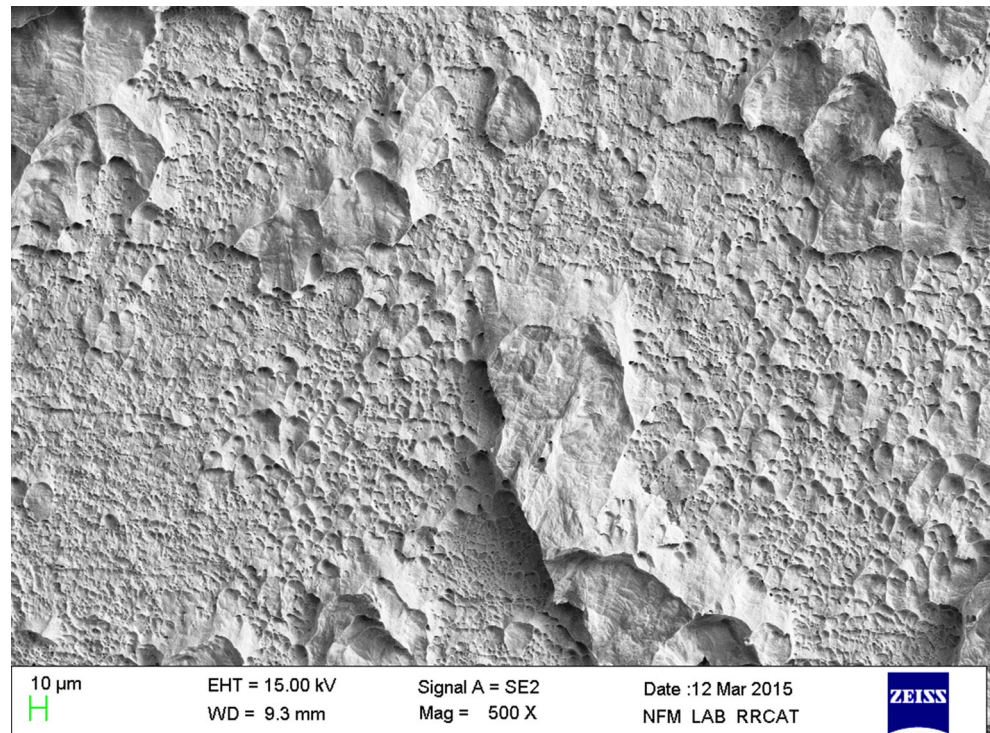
Dimpled morphology of tensile fracture surface of “Ni-plated” 316L stainless steel and OFE Cu brazed specimen. Site of fracture was in the braze joint
